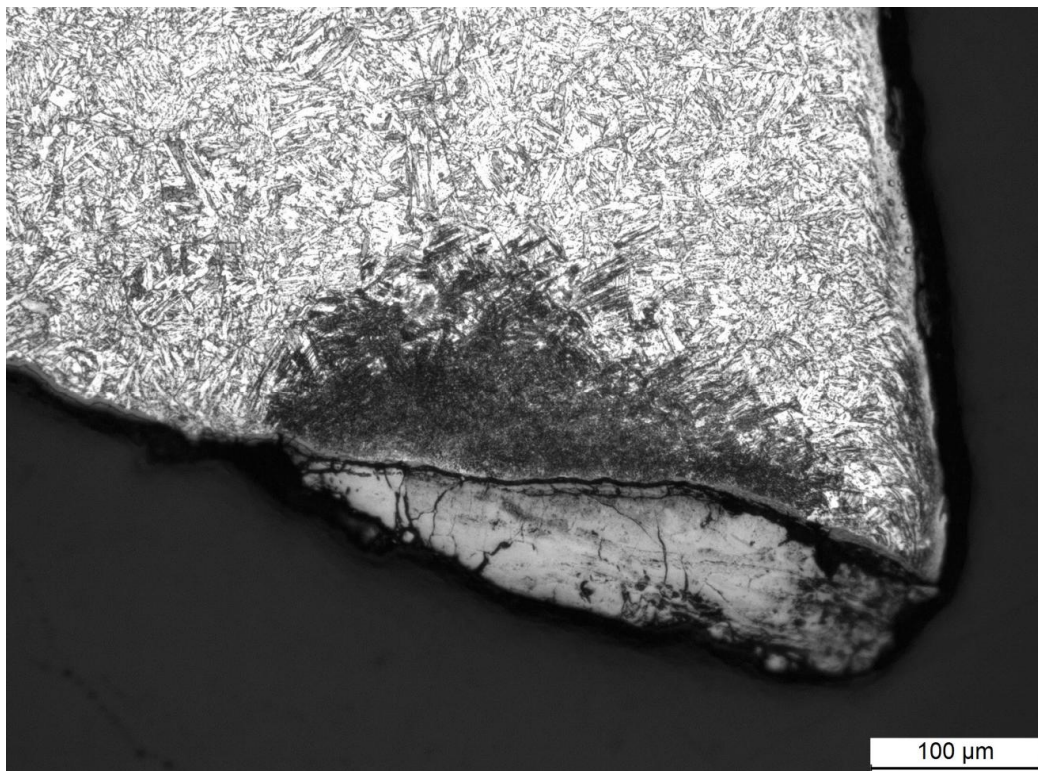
Cross-section with surface oxide at the fracture initiation site of blade 108.
